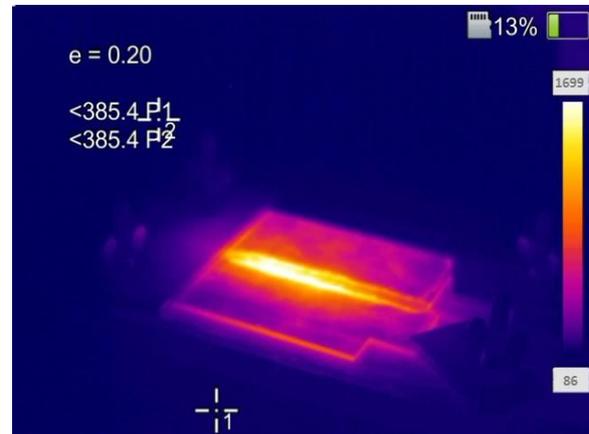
Temperature measurement by thermal camera on 4.5 mm/sec welding speed.
